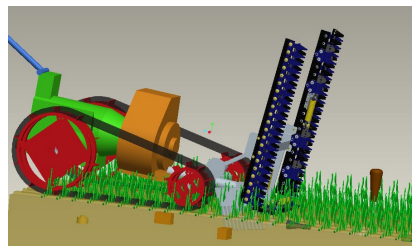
Digital mock up of robot composed by three modules: tractor unit, ground processing tool and vegetation cutting tool.
